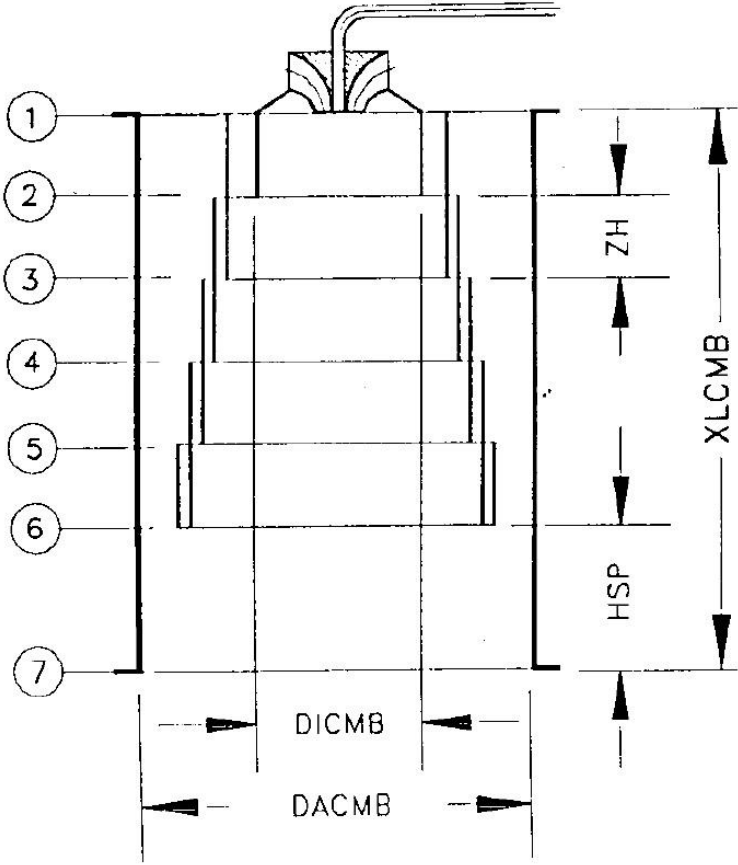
Tubular combustion chamber; Reprinted from Schobeiri [31].
